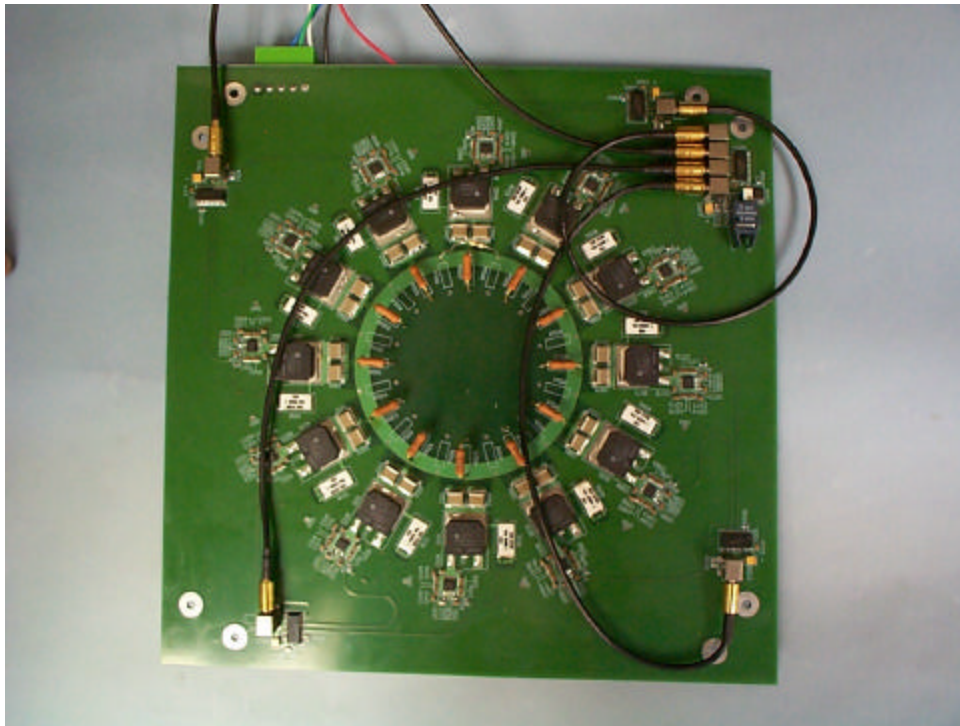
Completed FIEC prototype modulator board with all MOSFETs installed.
